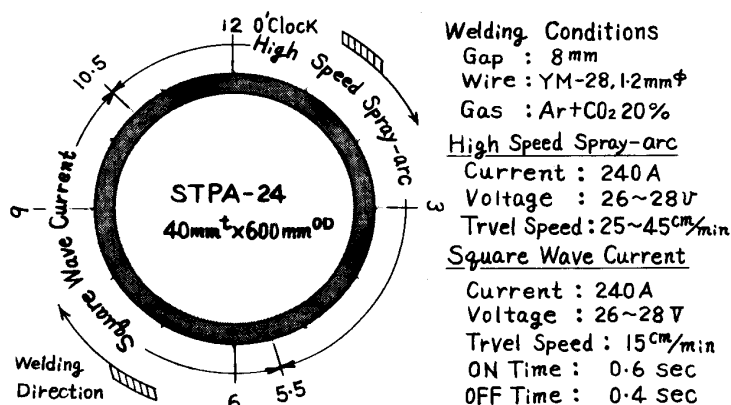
Conditions of All Position Welding of Pipe
